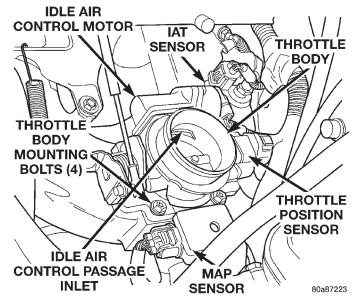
Throttle Body and Sensor Locations—2.5L Engine
